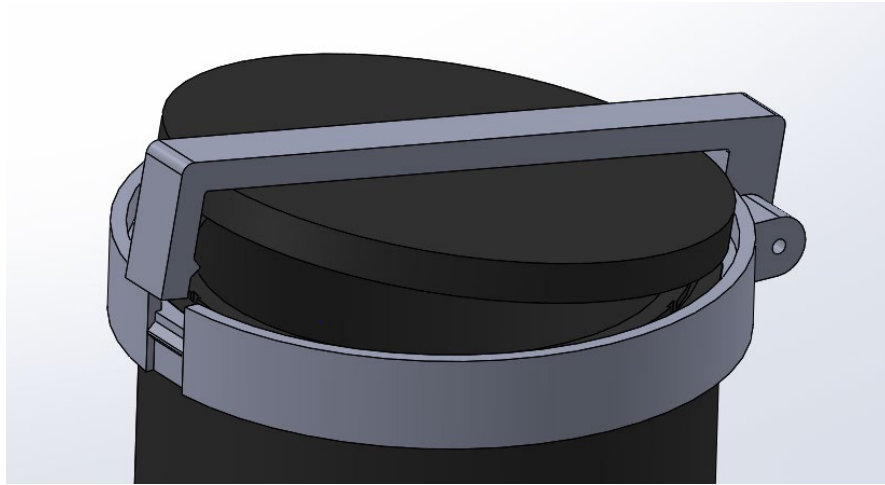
Latching mechanism CAD model for the CT TEC.
